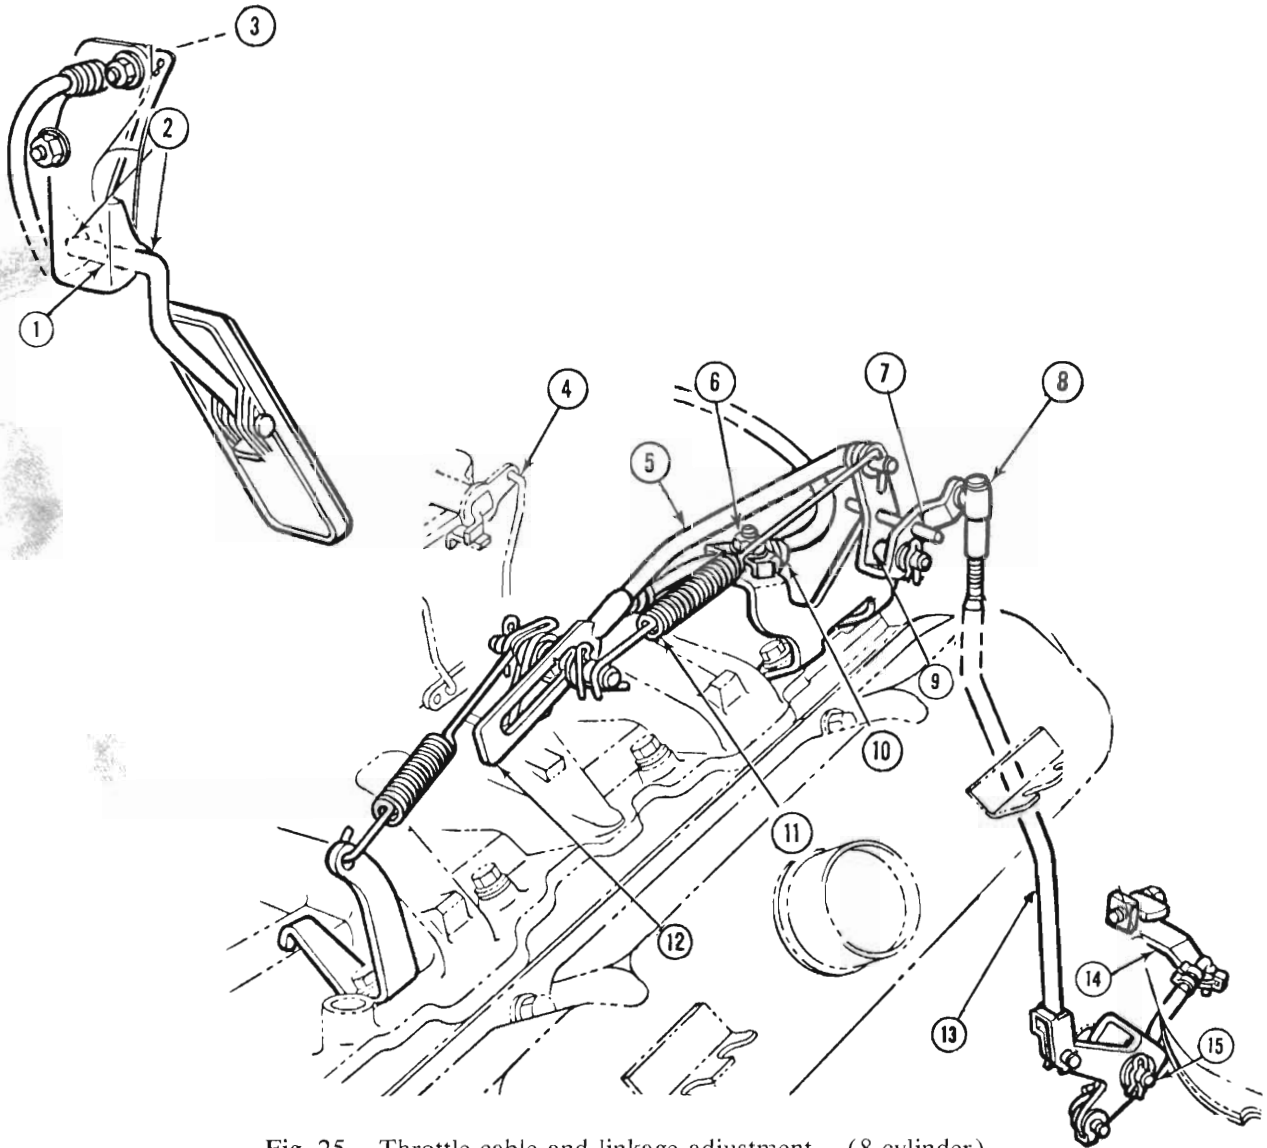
Throttle cable and linkage adjustment - (8 cylinder)
